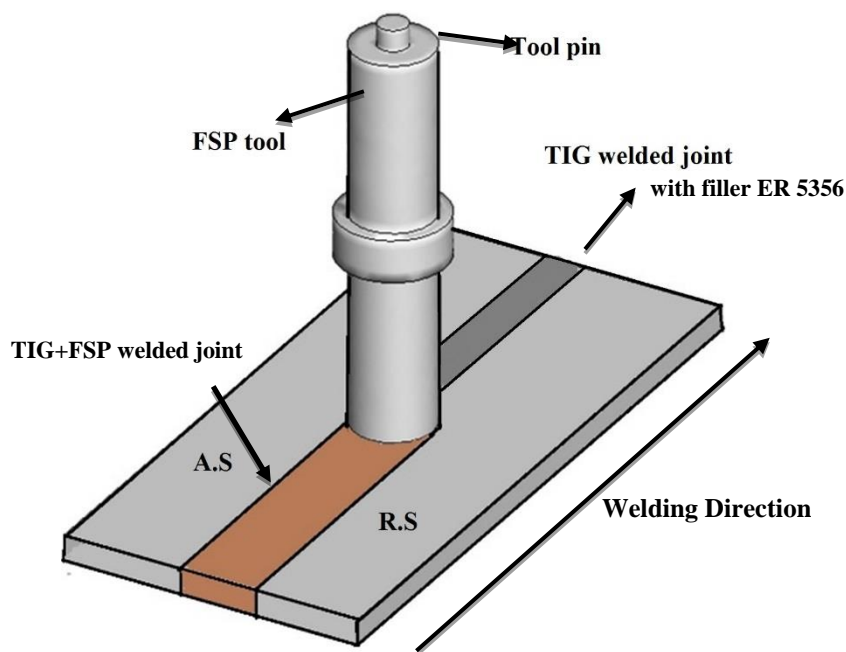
TIG+FSP welding with filler ER 5356
